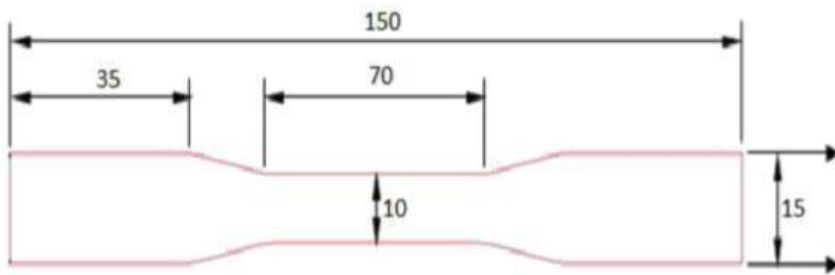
Tensile Test Specimen (ASTM-E08Standard)
